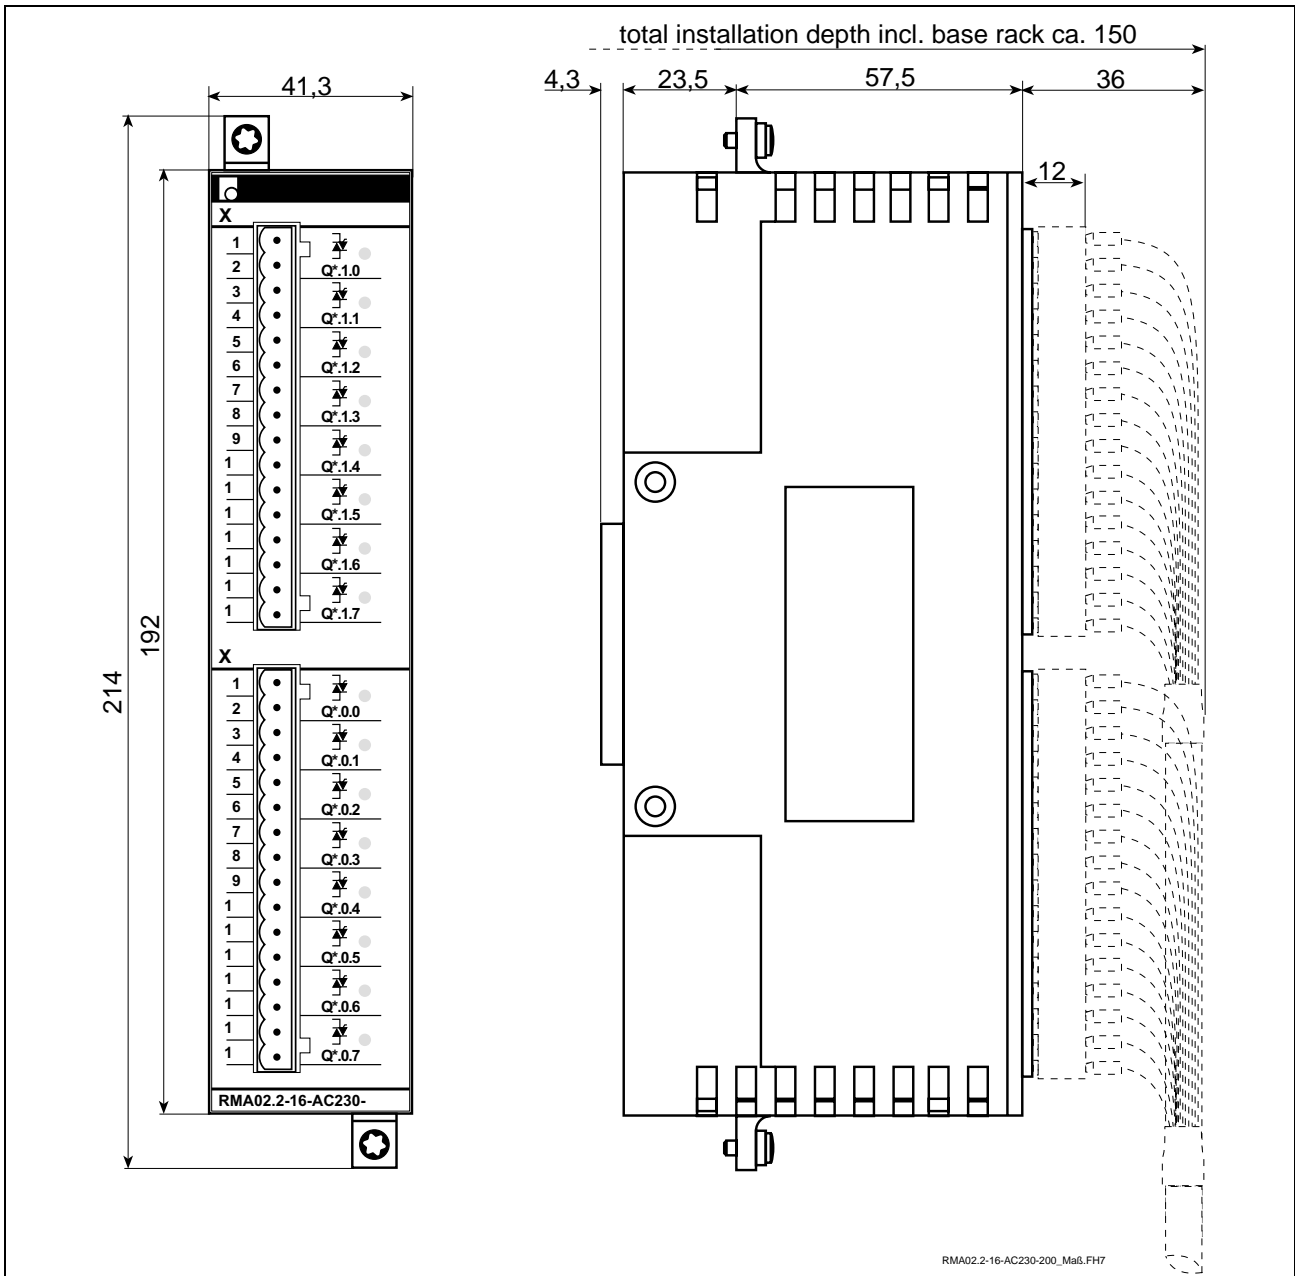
Mounting dimensions RMA02.2-16-AC230-200
